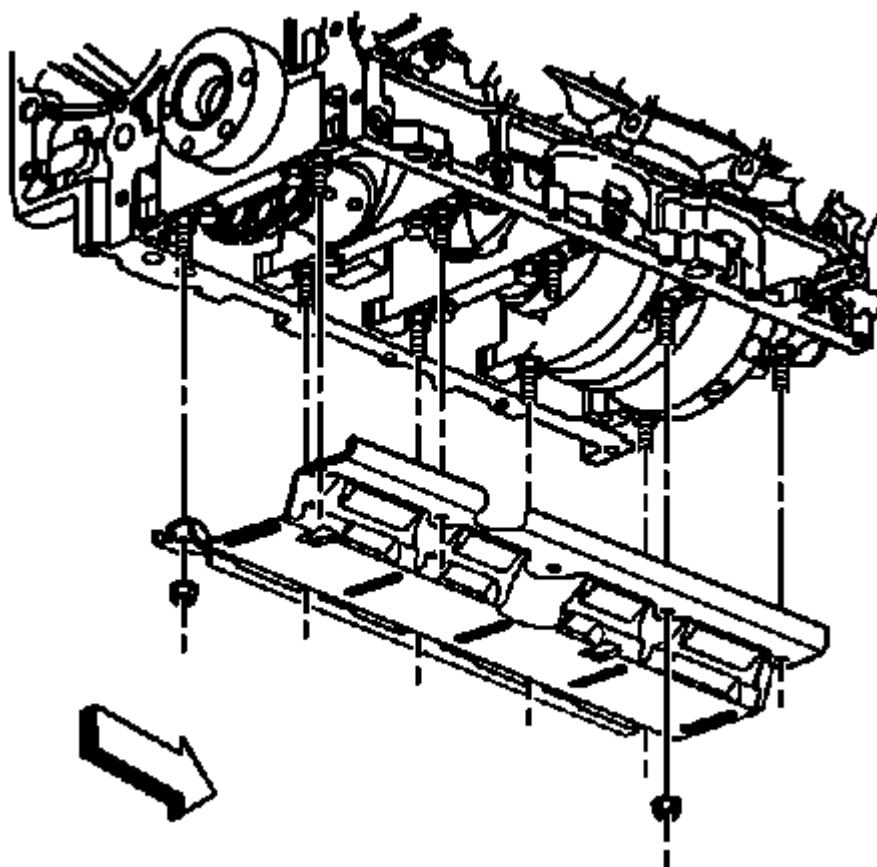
View Of Crankshaft Oil Deflector & Nuts
